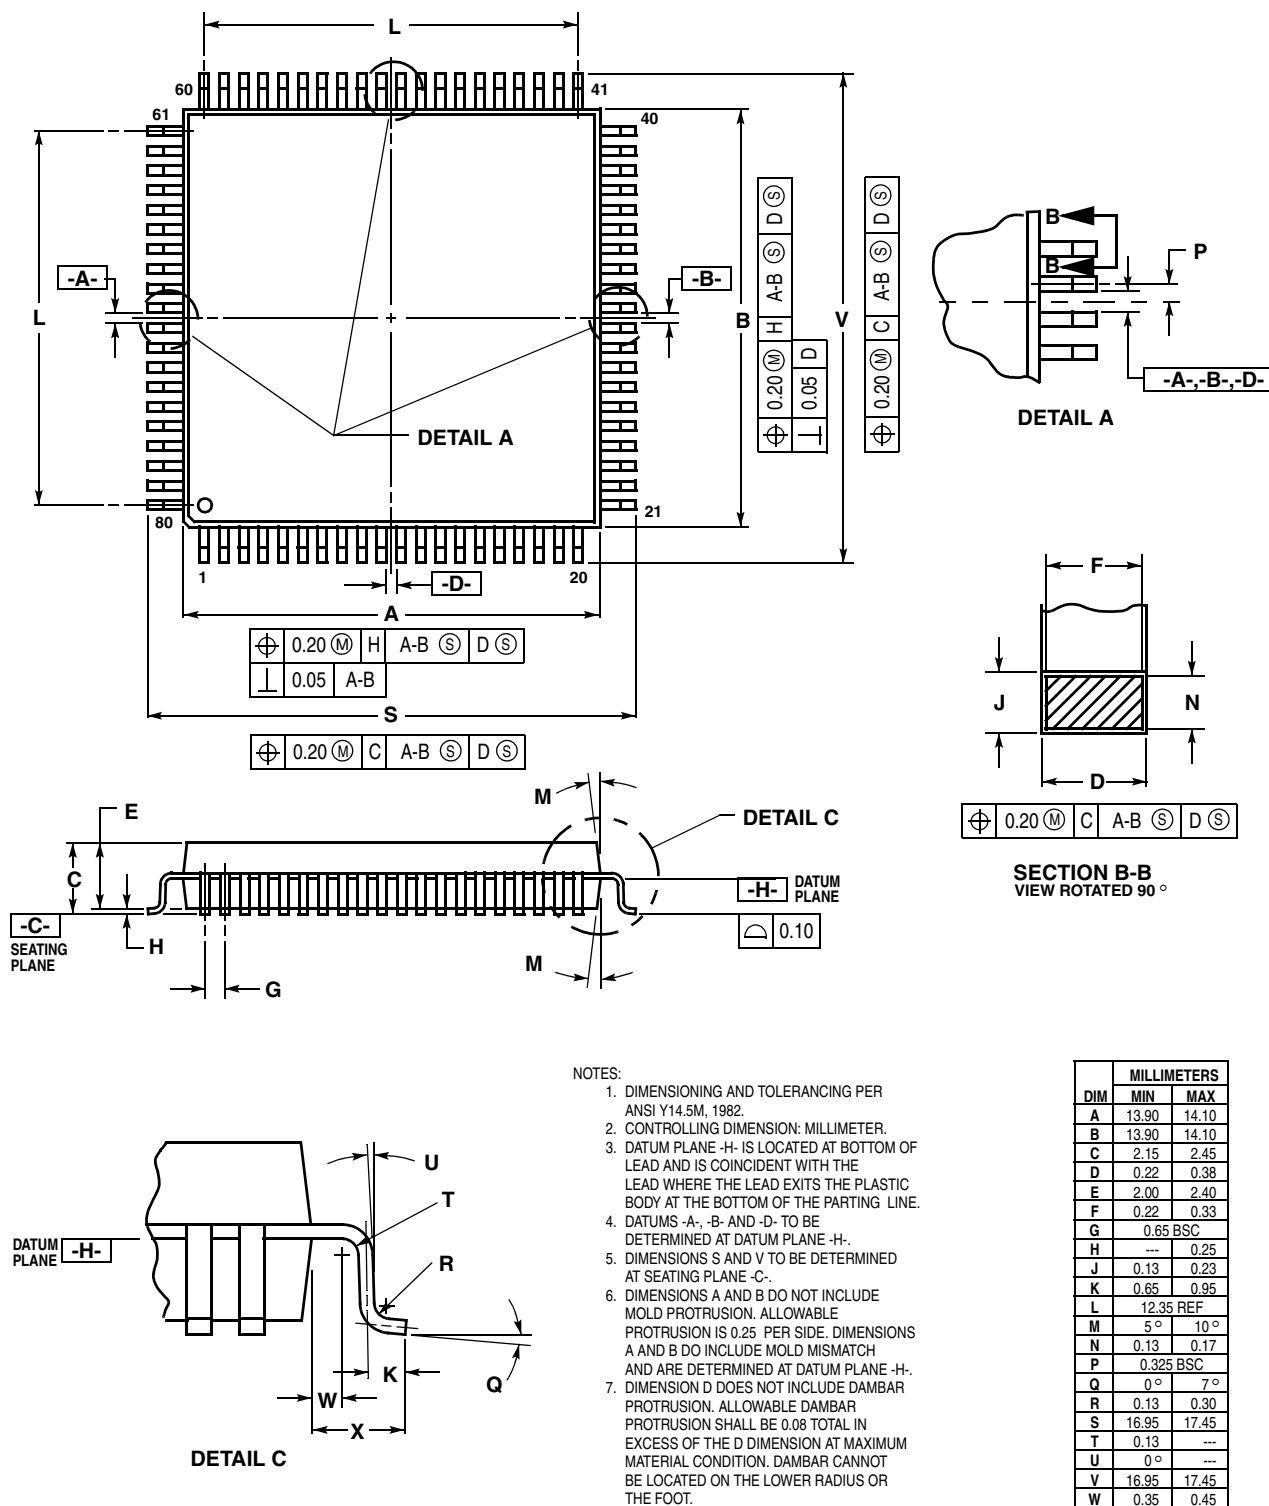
80-pin QFP Mechanical Dimensions (case no. 841B)
